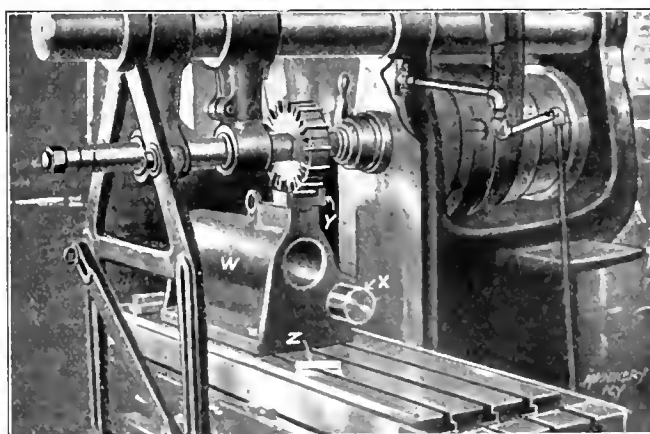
Setting the Mill for Cutting the Slots for the Indexing Blocks, using a Gage fastened to the Fixture.
